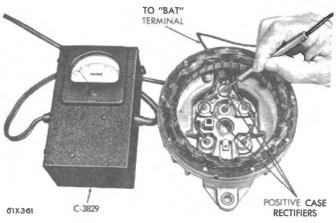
Testing positive case rectifiers (Tool CA-3829).
